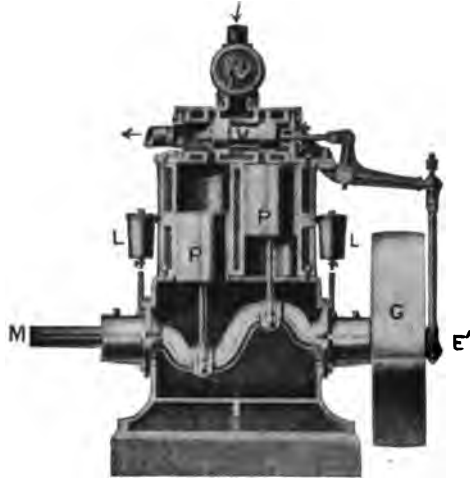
Two-cylinder Single-acting Steam Engine.
